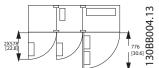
Space in front of IP21/IP54 enclosure type, frame size F3
